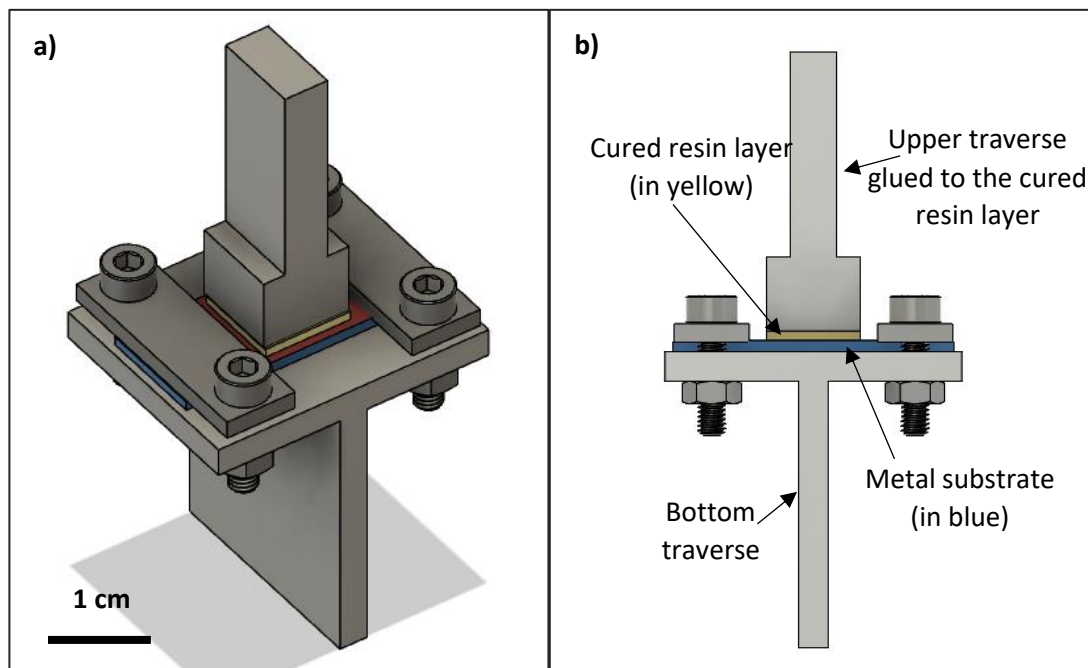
Initial tensile test set up a) 3D view b) 2D side view (the resin layer is not in actual scale with the other components)
